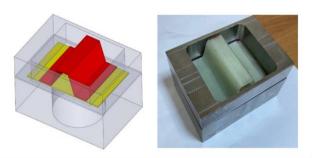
Technical Rrawing of the First Mold and its Appearance After Production.
